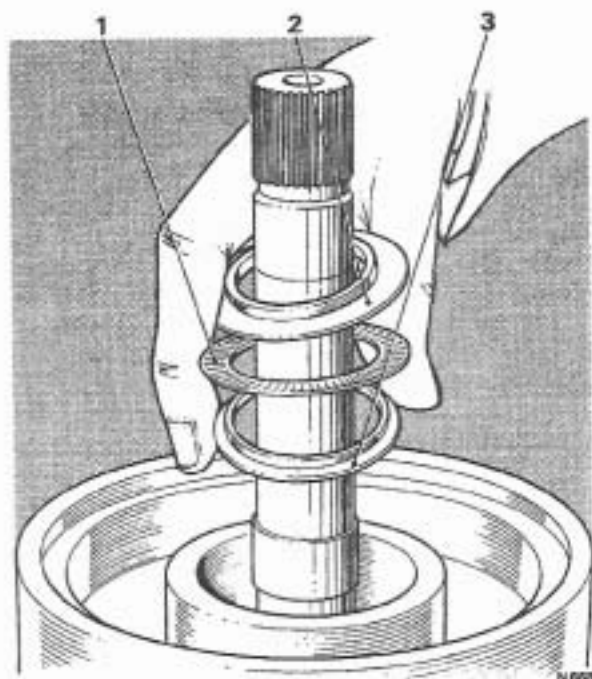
FITTING RACES AND THRUST BEARINGS TO SUN GEAR
